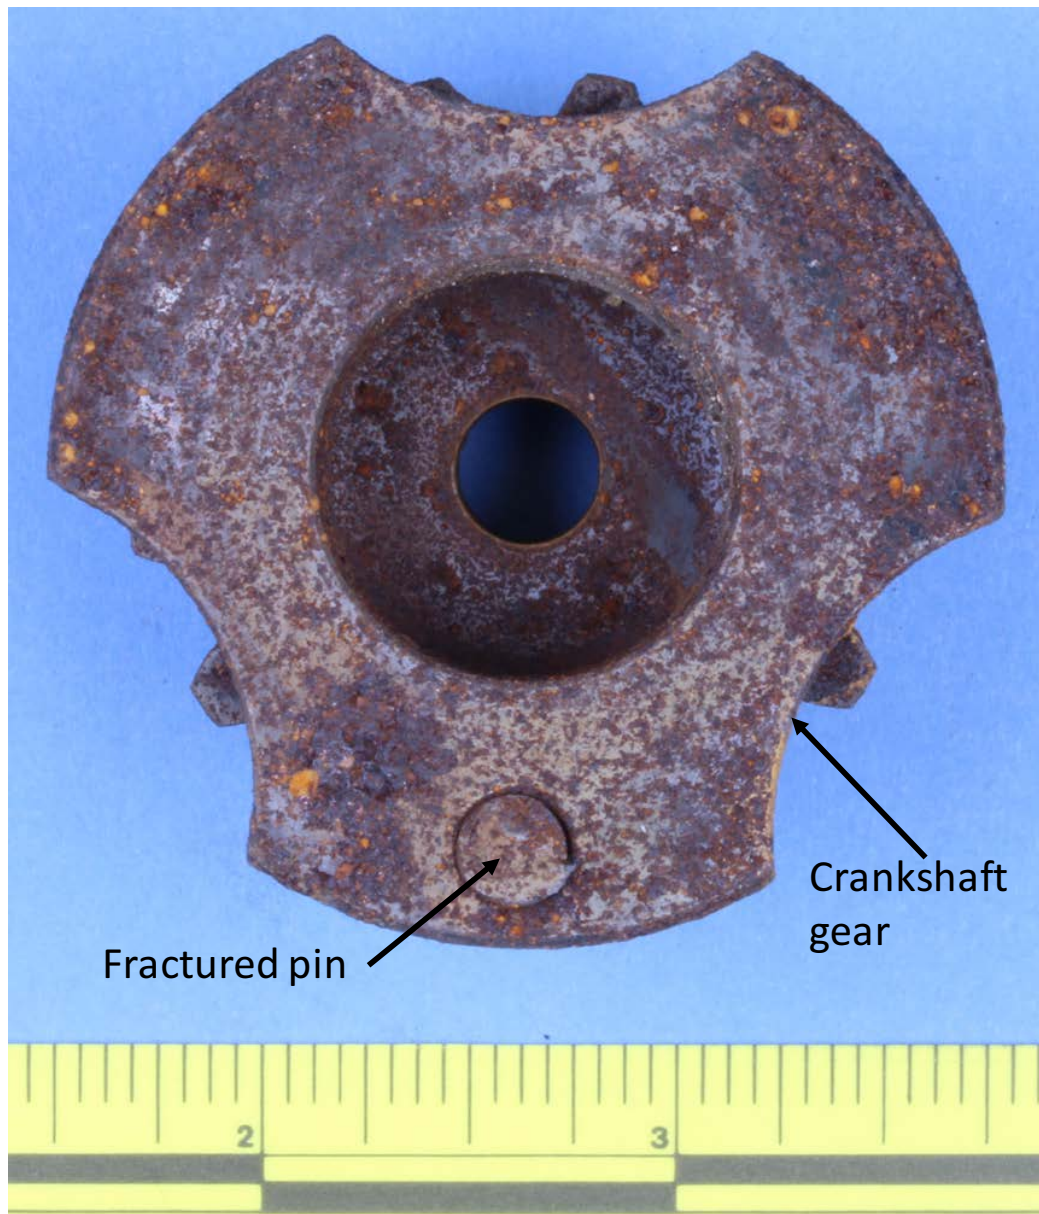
Image of the reverse side of the crankshaft gear showing the fracture surface of the dowel pin.
